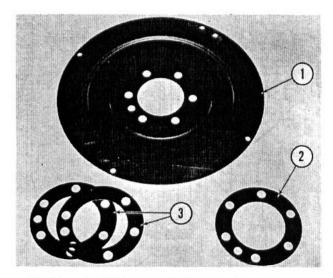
CONVERTER DRIVE PLATE COMPONENTS
